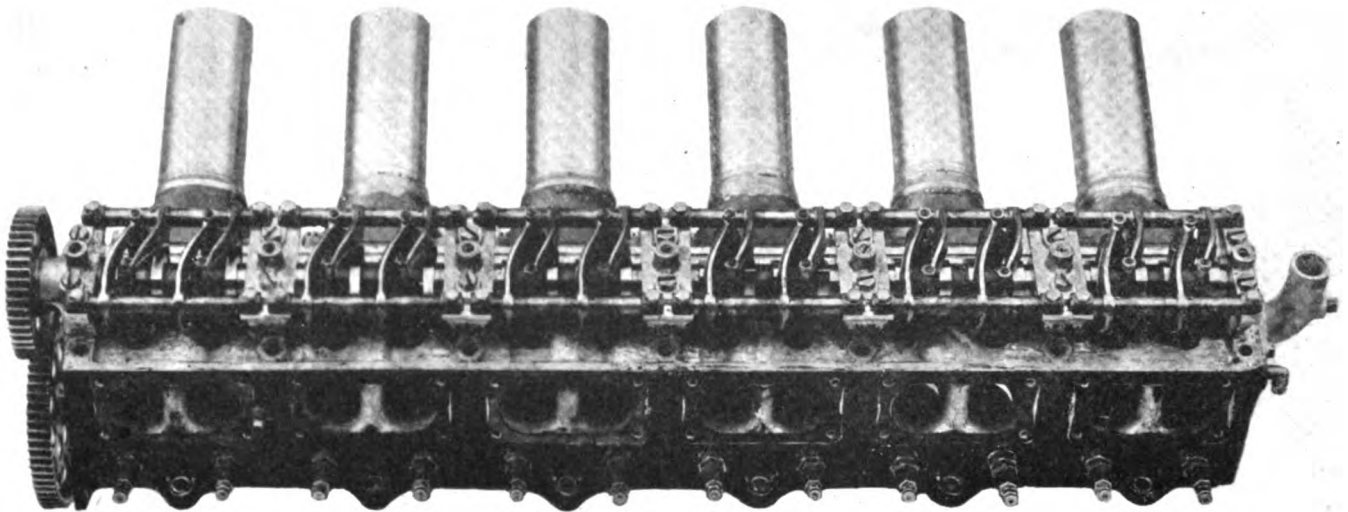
Cylinder head assembly of Kessler super-charge engine for aviation purposes
